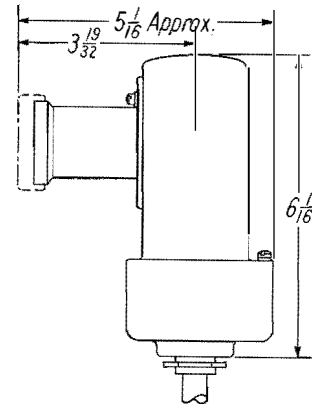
TYPES A AND B PHOTOTUBE HOUSINGS
